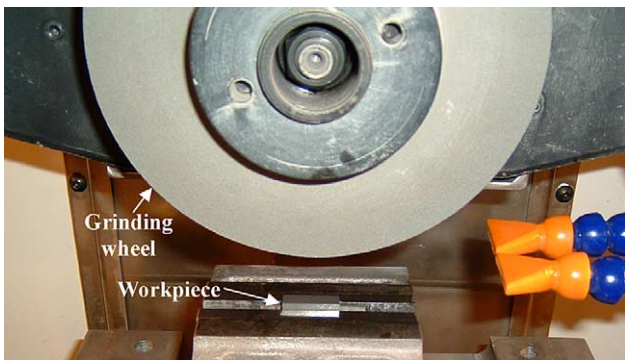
Surface grinding experiment set-up and the silicon nitride workpiece (6 mm  $\times$  20 mm surface area).
